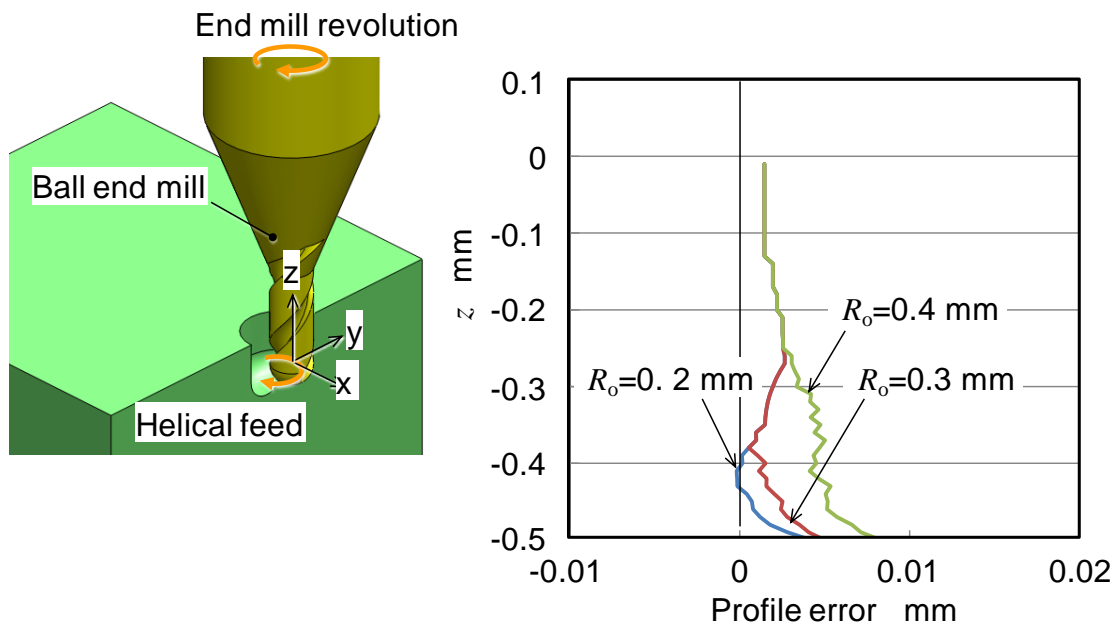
28 Relationship between helical feed radius R_o and Profile error of the machined surface for CW (Up milling), flank wear $VB=0.01\text{mm}$, and helical feed pitch $p_h=0.05\text{mm}$.
